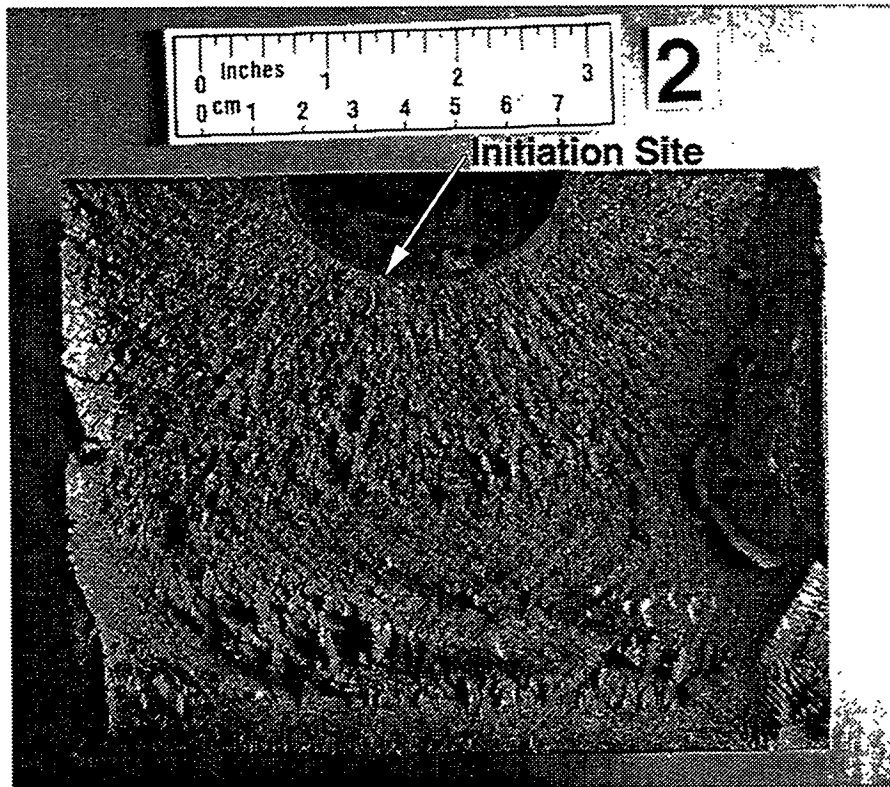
Fracture surface for finite-length flaw specimen CF-2 showing location of cleavage initiation site
